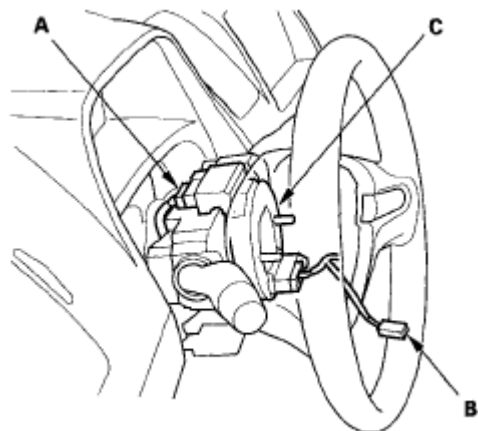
Identifying Cable Reel 20P Connector, Horn Switch 1P Positive Terminal And Cable Reel
